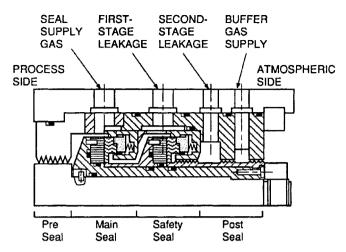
Tandem dry seal configuration. (Revolve Technologies, Calgary, Alberta, Canada)
